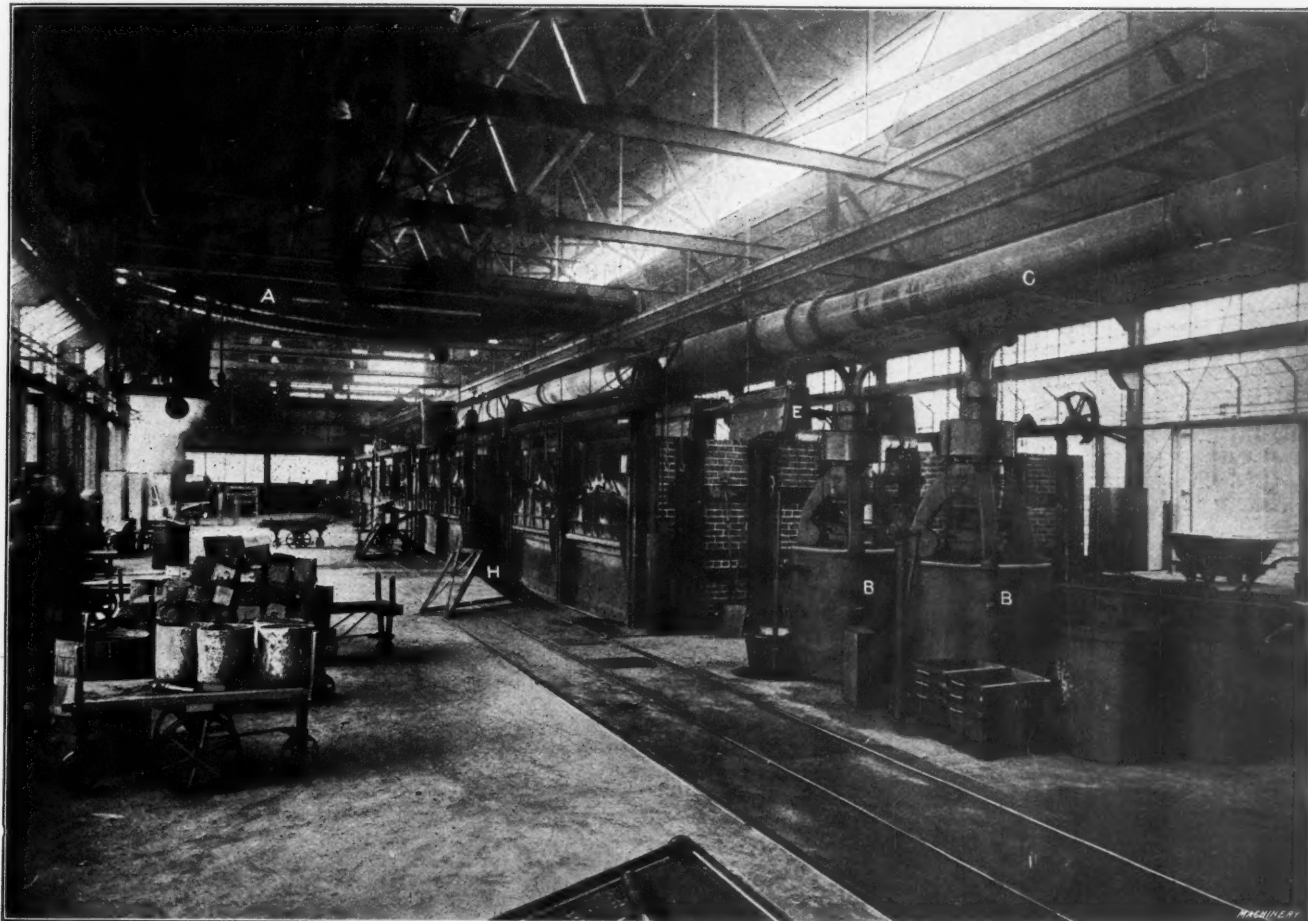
North Half of Heat-treatment Building recently added to Dodge Bros. Plant, Detroit, Mich.
